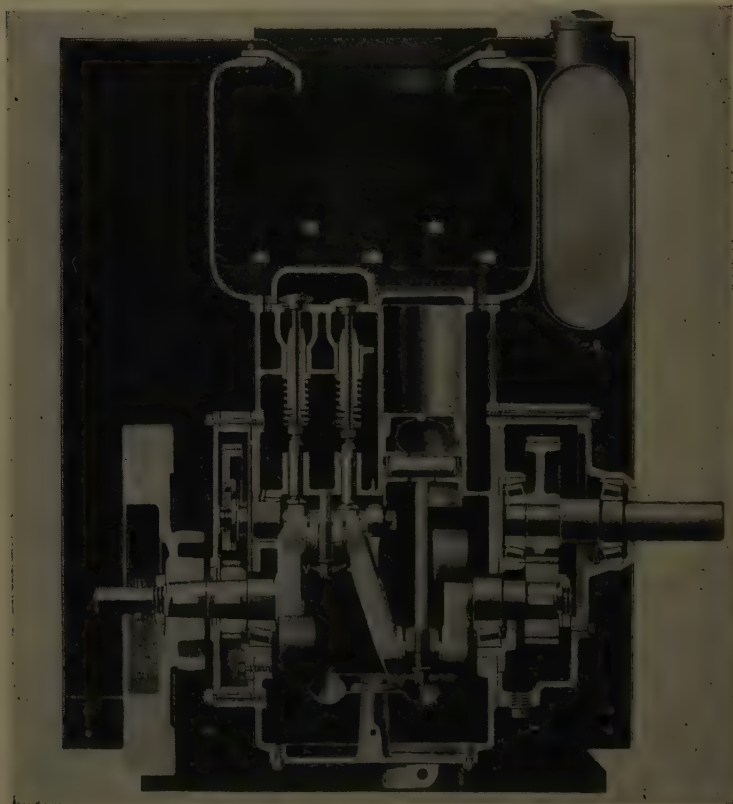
AUTOMOTIVE-TYPE INDUSTRIAL ENGINE
